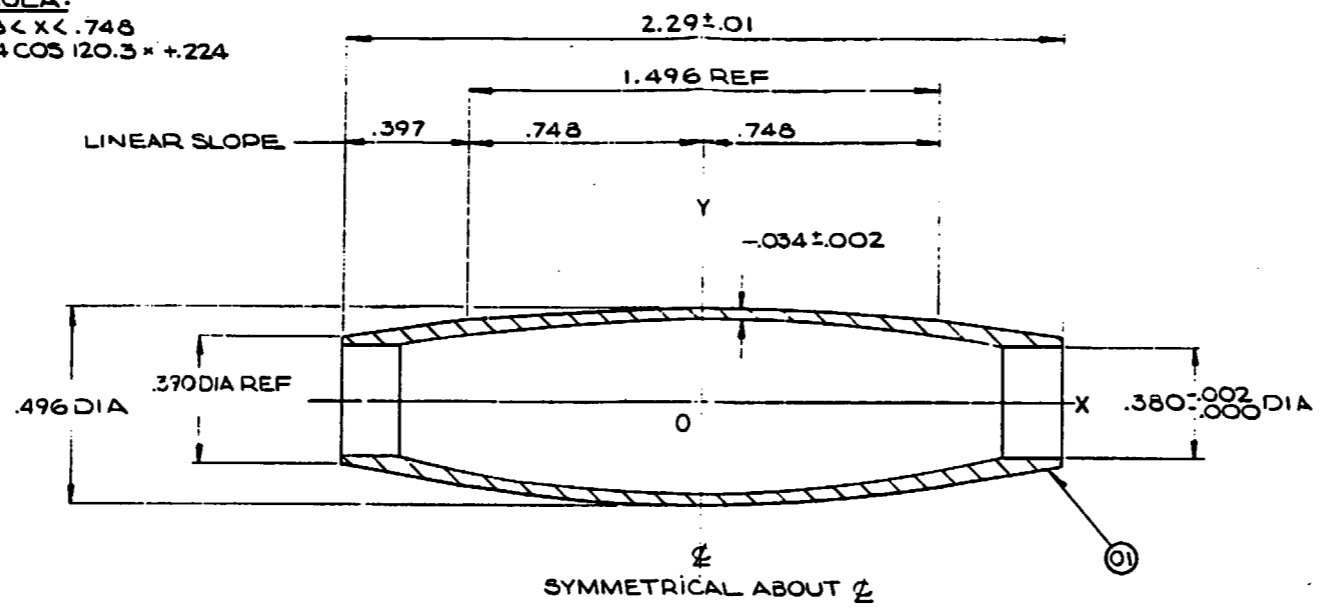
FLECHT SEASET 21-Rod Bundle Filler Strip (sheet 2 of 2)
